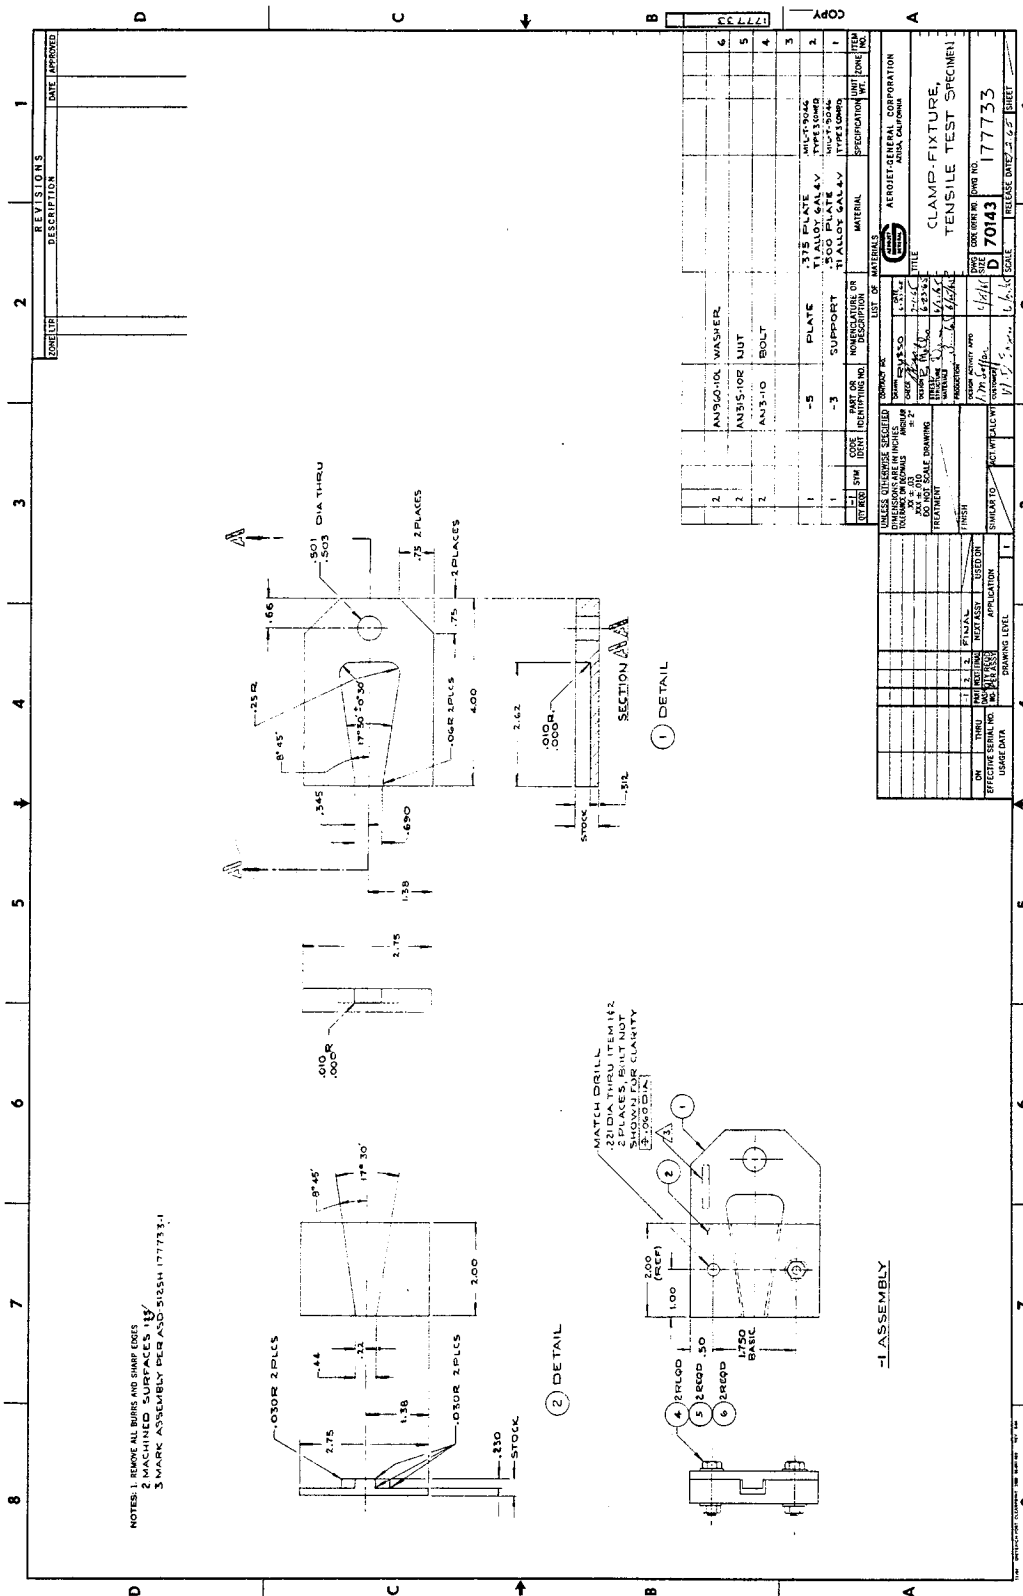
Clamp Fixture, Tensile-Test Specimen
